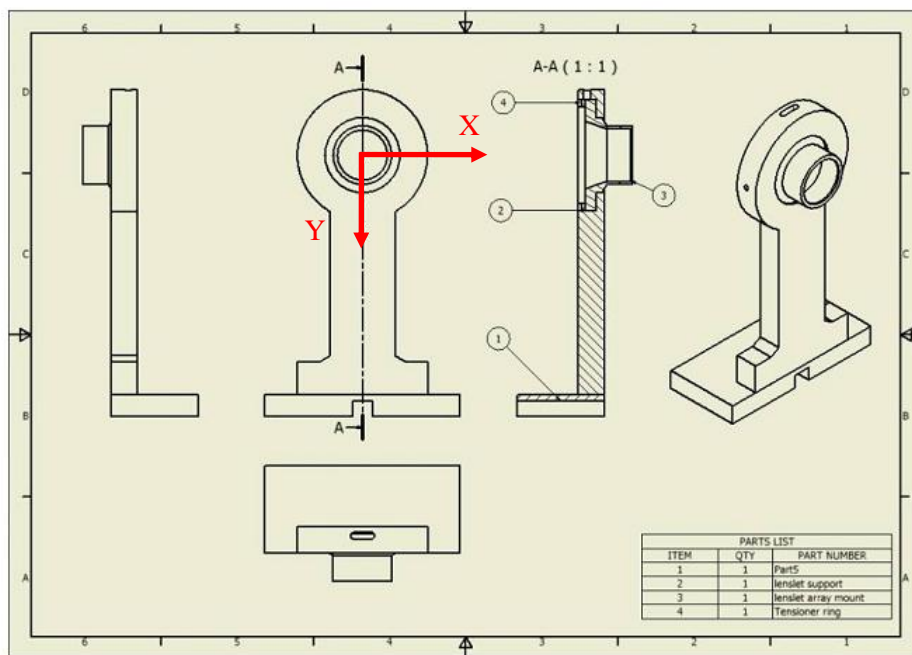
Drawing of the lenslet array mount. The XY coordinate system is showed.
